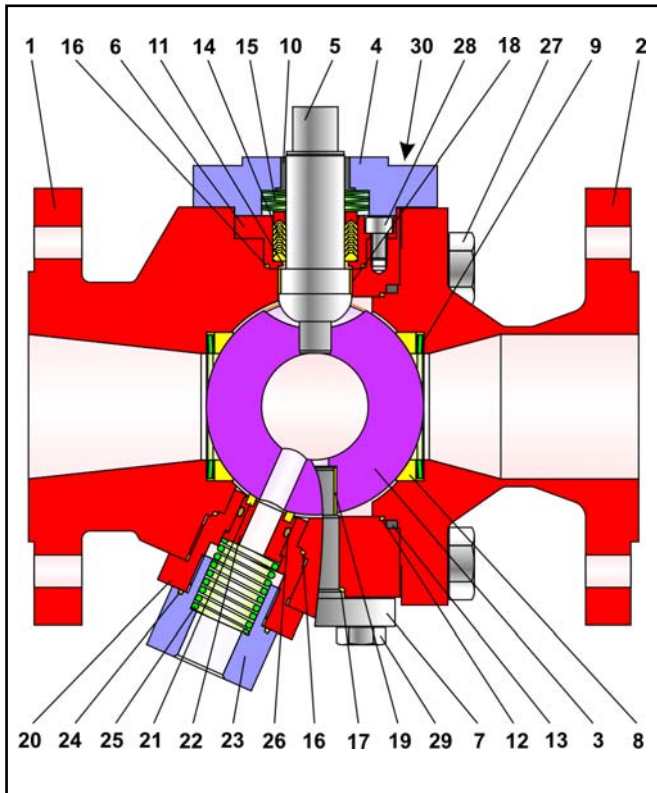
Sectional drawing of the shut-off ball valve series 51b
